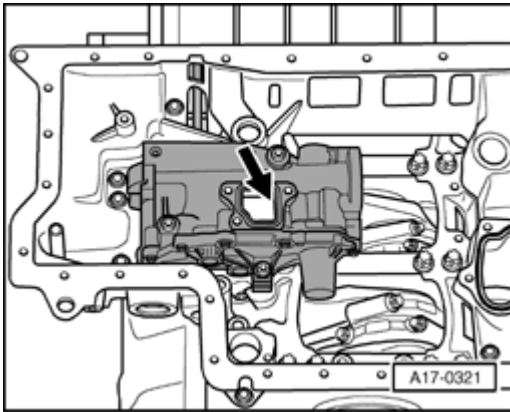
Checking Whether Drive Shaft Is Friction Locked To Oil Pump
